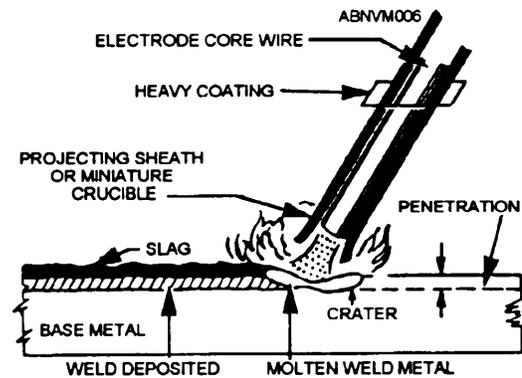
Welding with a heavy coated electrode.
